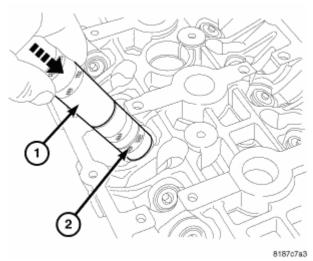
Valve Keeper Tool Courtesy of CHRYSLER LLC
